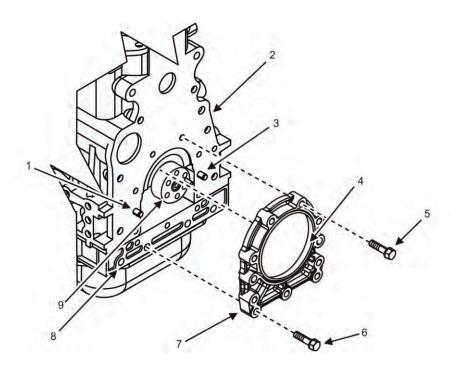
Crankcase Rear Bearing Case Cover — Removal.
